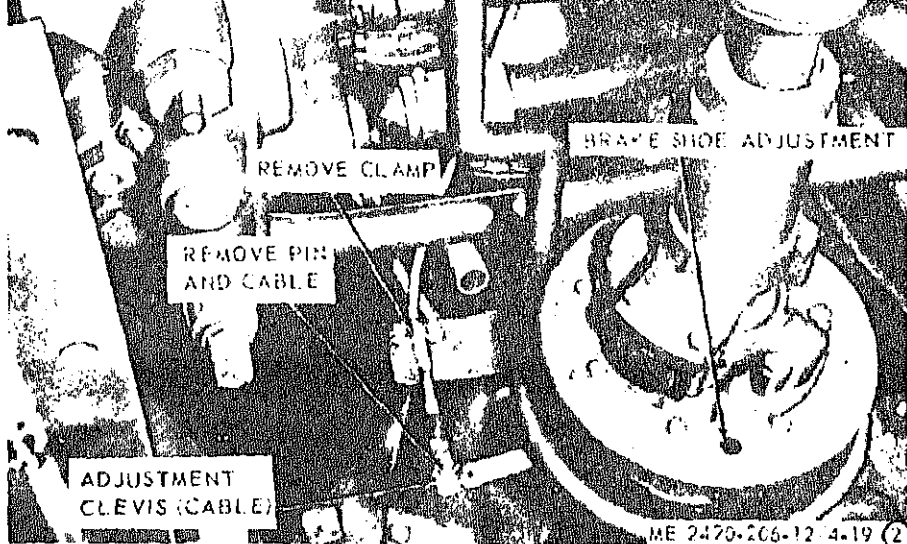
Parking brake hand lever and cable, removal and installation (sheet 2 of 2).
